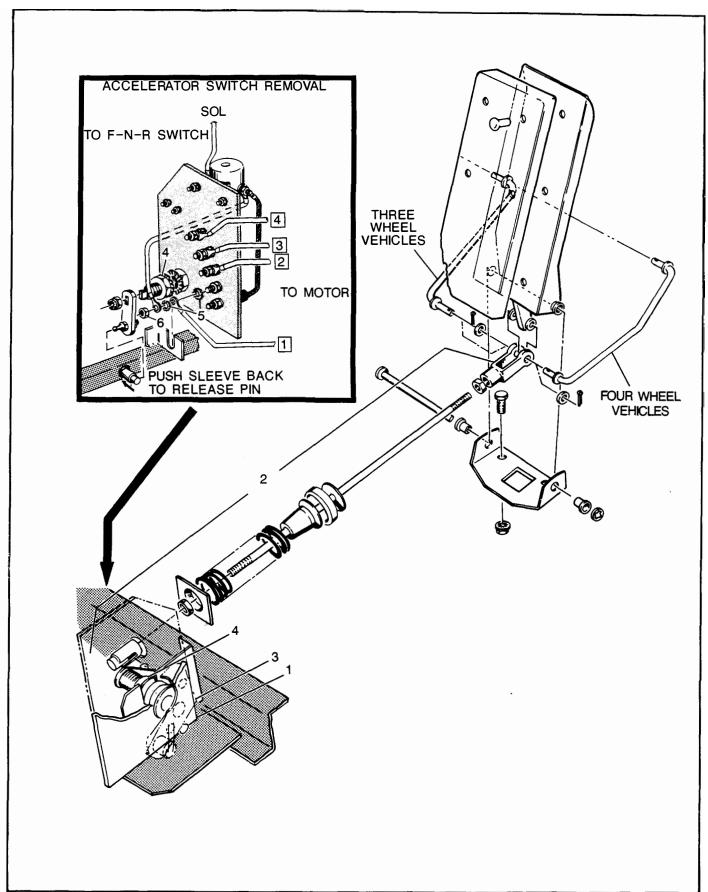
ACCELERATOR AND HILL BRAKE LINKAGE
